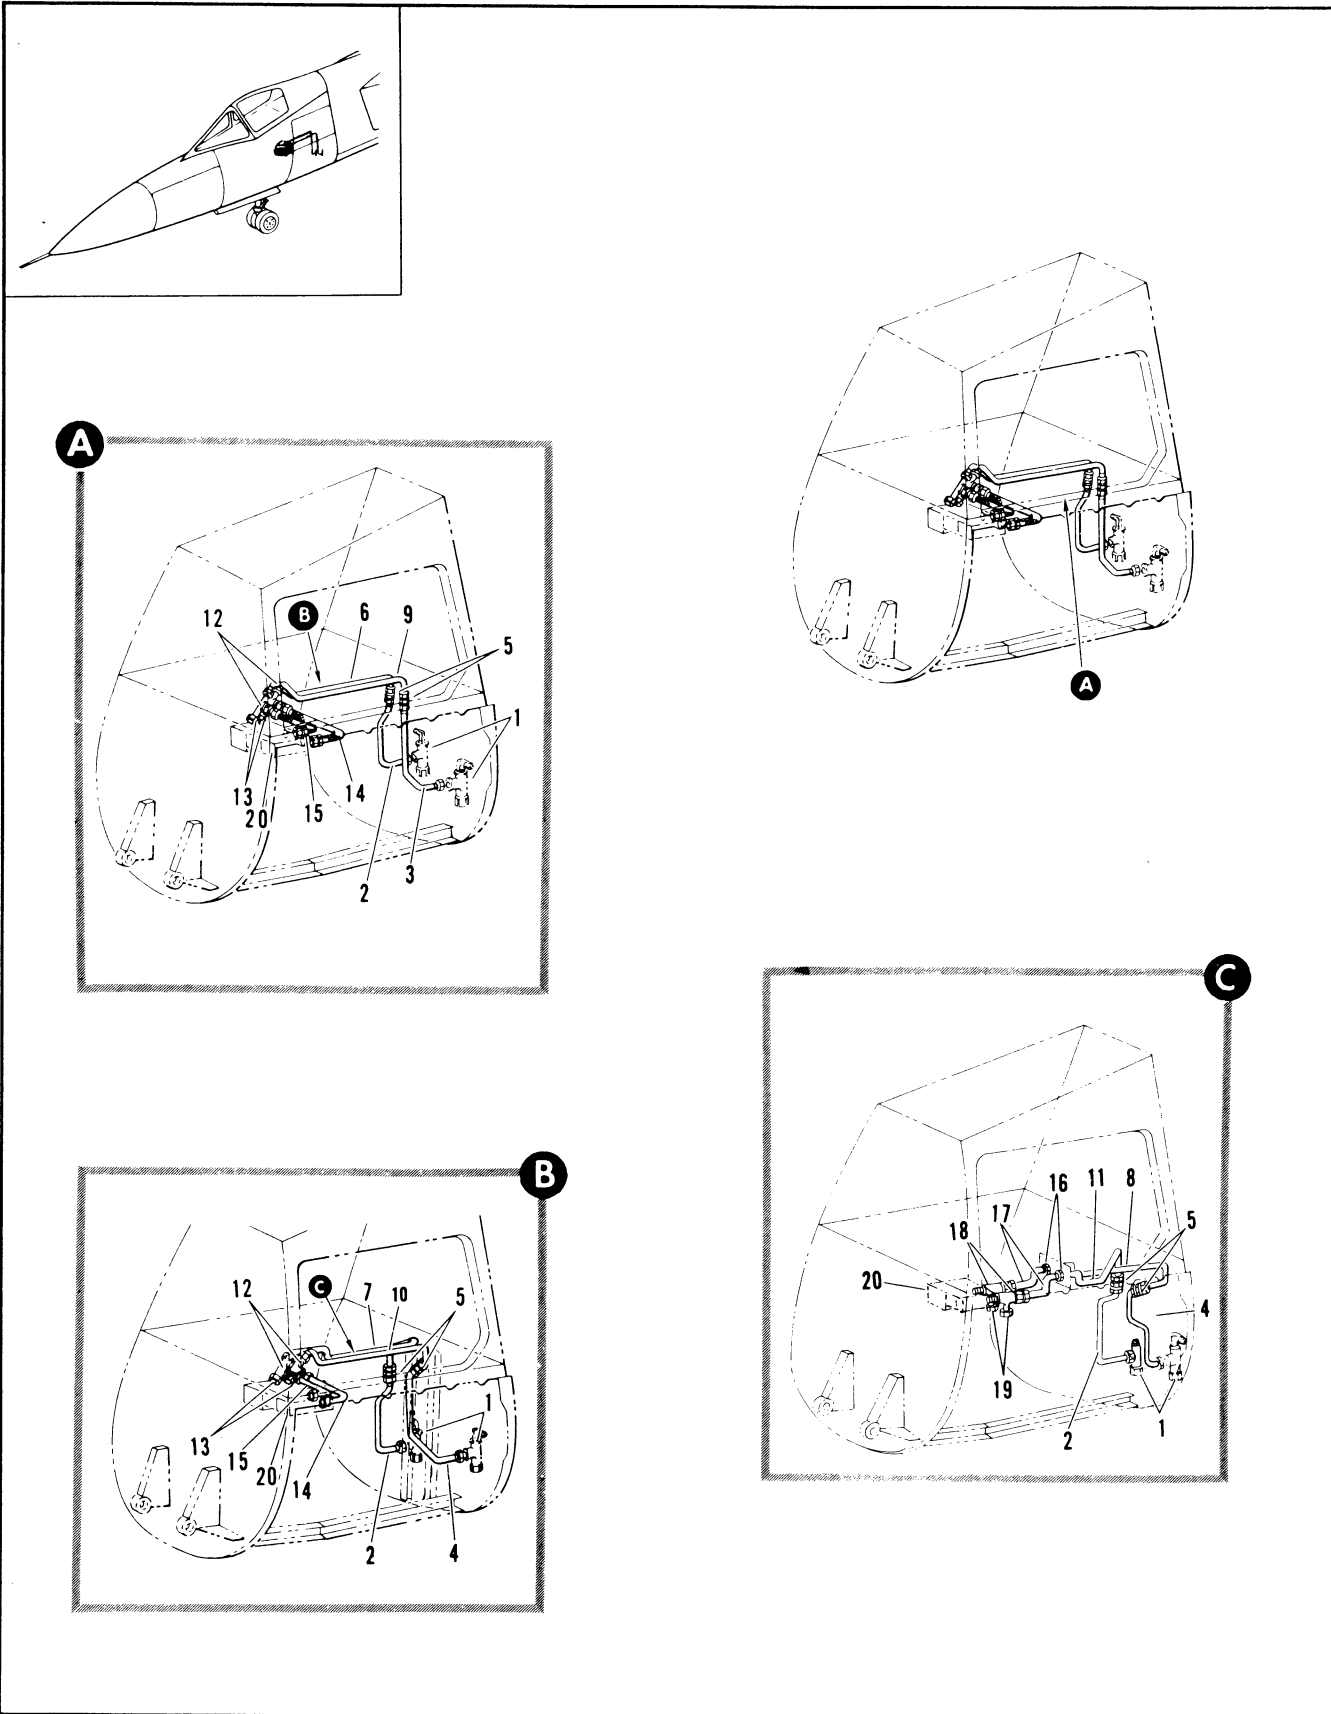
Variable Air Ramp Pitot Static Tubing Installation Sta 171 to 216
